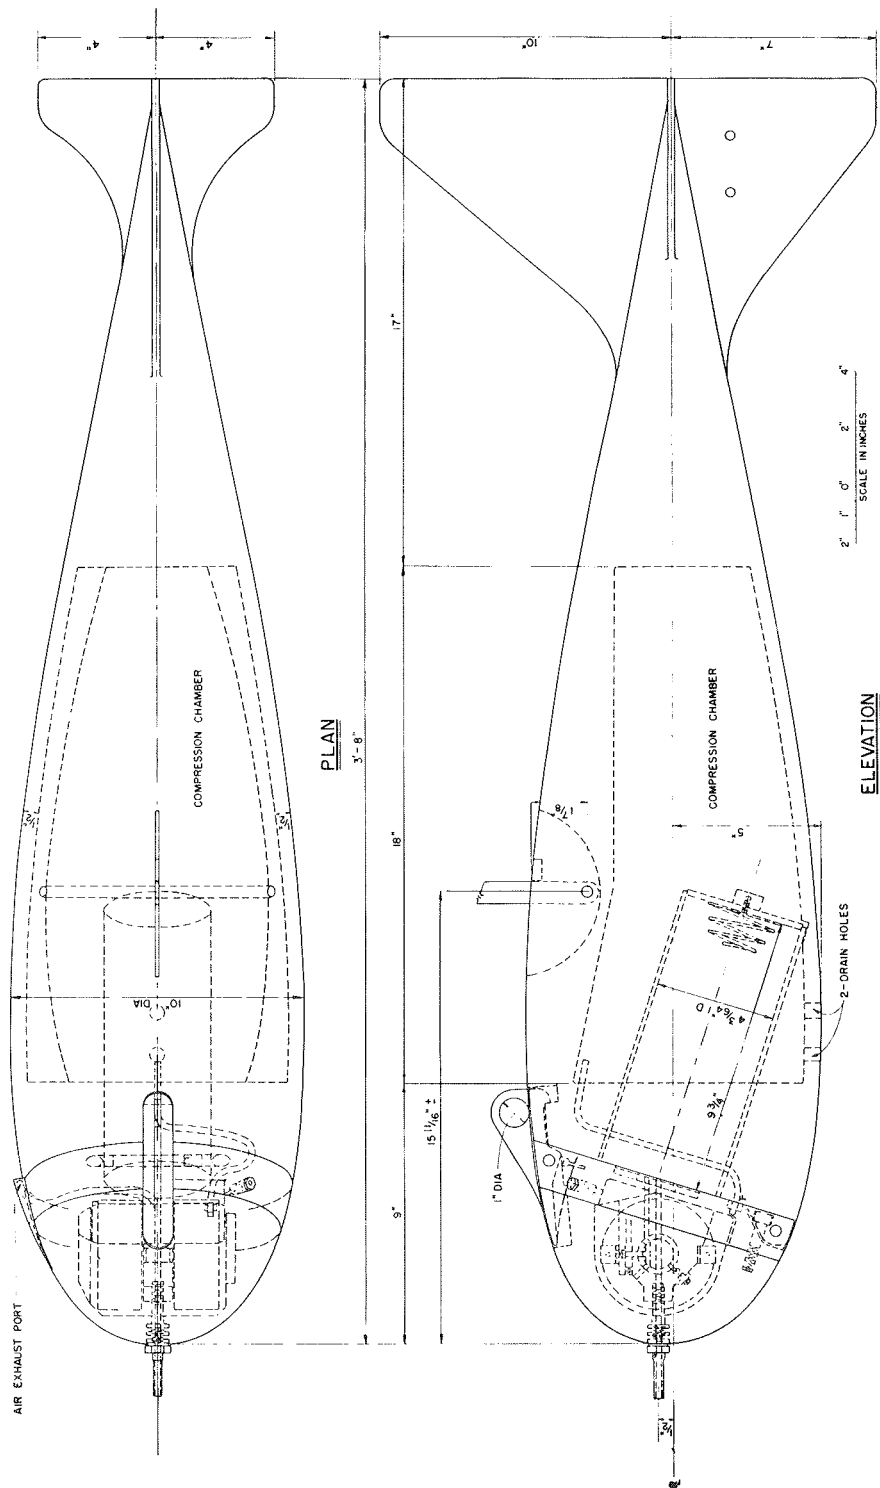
POINT-INTEGRATING SAMPLER, US P-50
